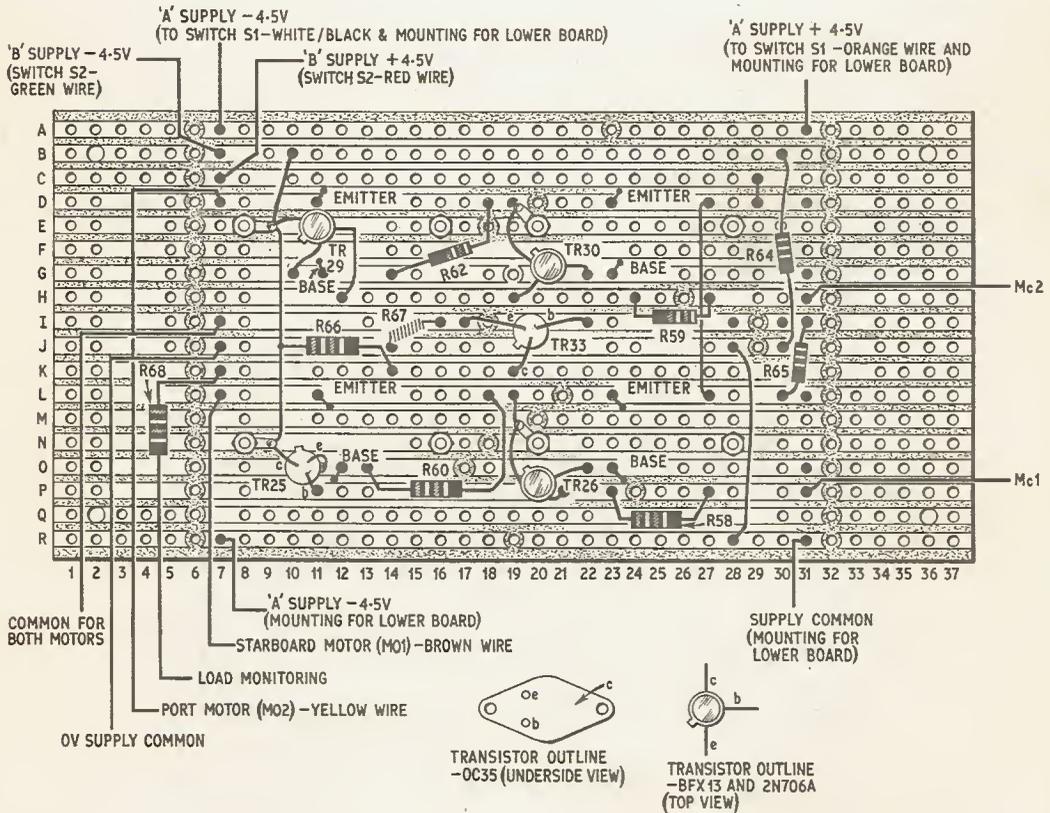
Underside view of the Veroboard showing component wiring and breaks in the circuit strips. Care should be taken that the emitter and base leads from the OC35's do not short with adjacent copper strips. All link wires should be of the plastic covered type. Transistors TR25 and TR33, which are mounted upside down, should be kept well clear of the copper strips
